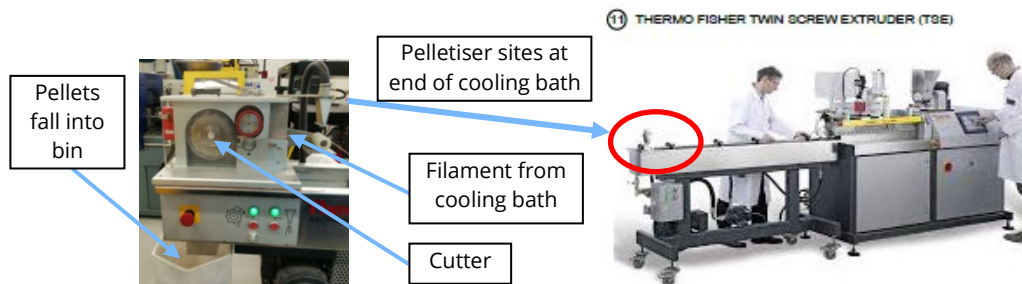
Thermo Fisher twin screw extruder and pelletiser
